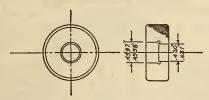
"Go" ring gage for diameter of shank shoulder and concentricity of serrated portion, B size
